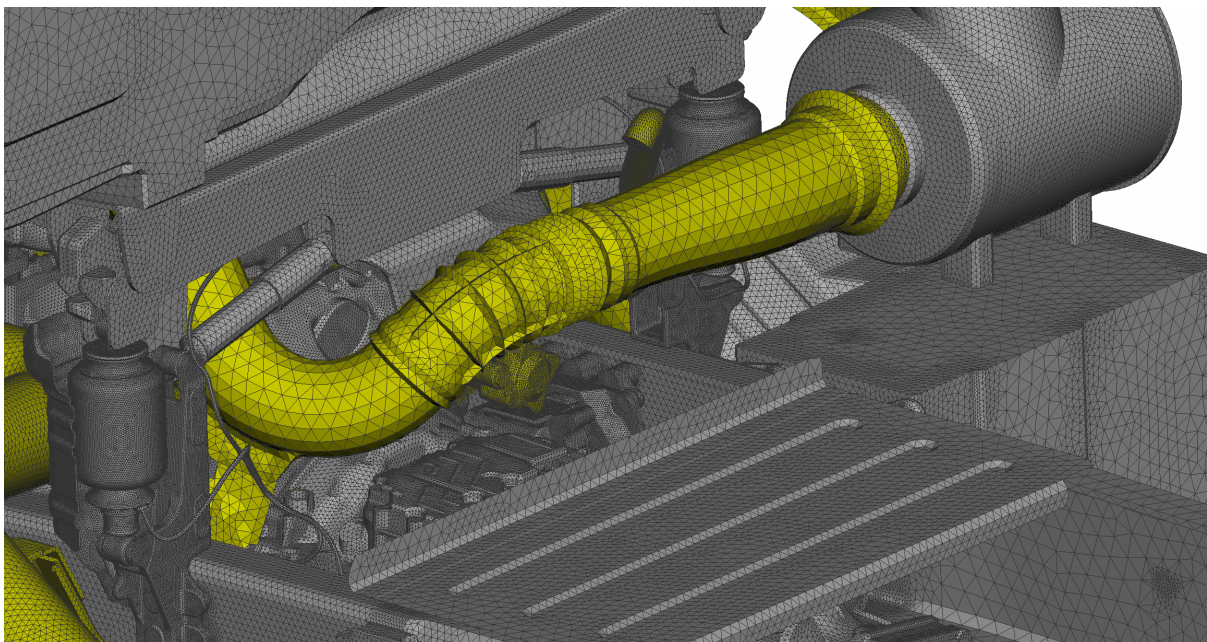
Ford Otosan truck, detail 2: original model.
